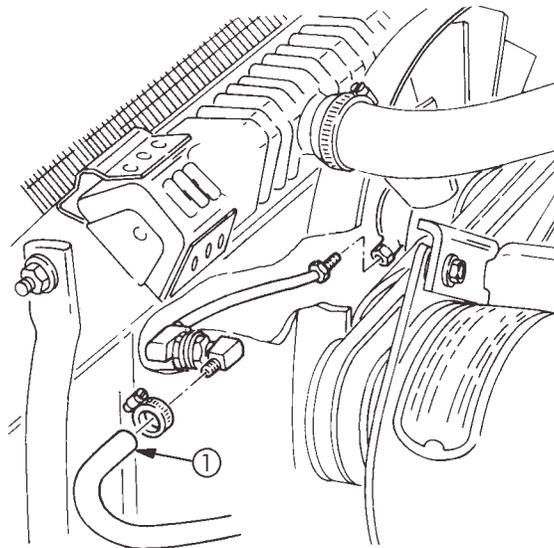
Fan Clutch Valve Pressure Test Hookup.
